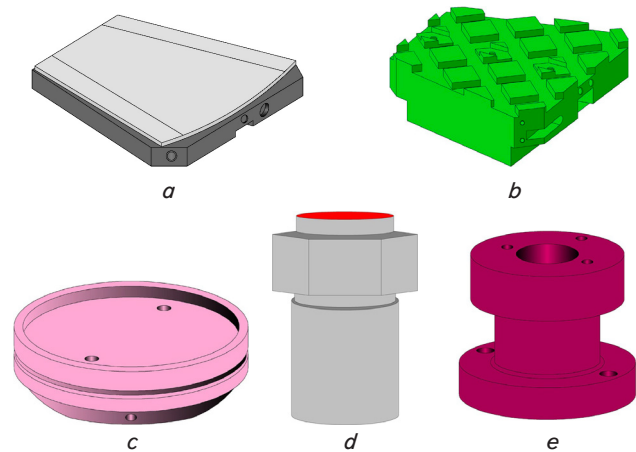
Three-dimensional models of the thrust bearing assembly parts: *a* – thrust bearing segment; *b* – trapezoid; *c* – elastic disk support; *d* – support bolt; *e* – bushing
